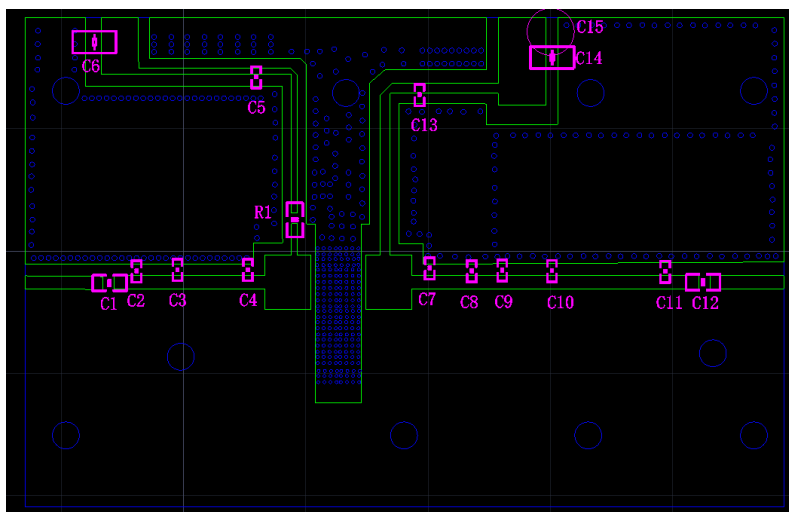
test fixture ,BOM and layout (Layout file upon request,)
